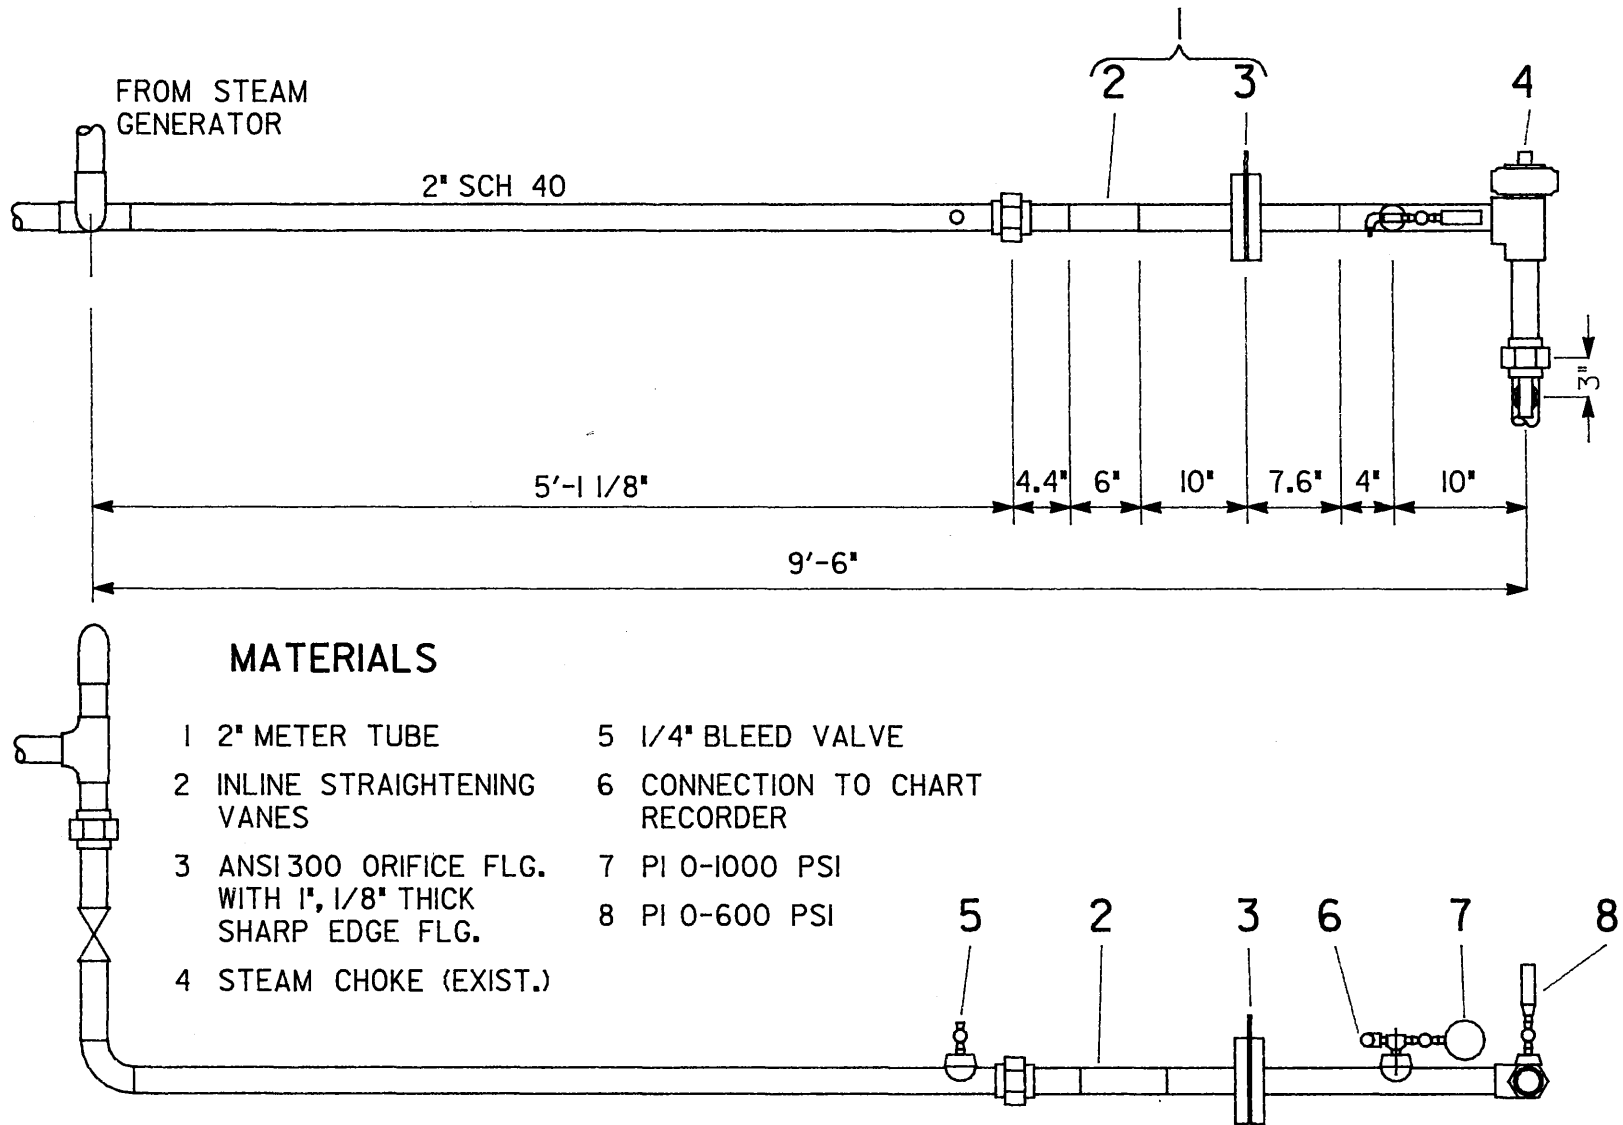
Plan and elevation views of the orifice/choke meter run.
